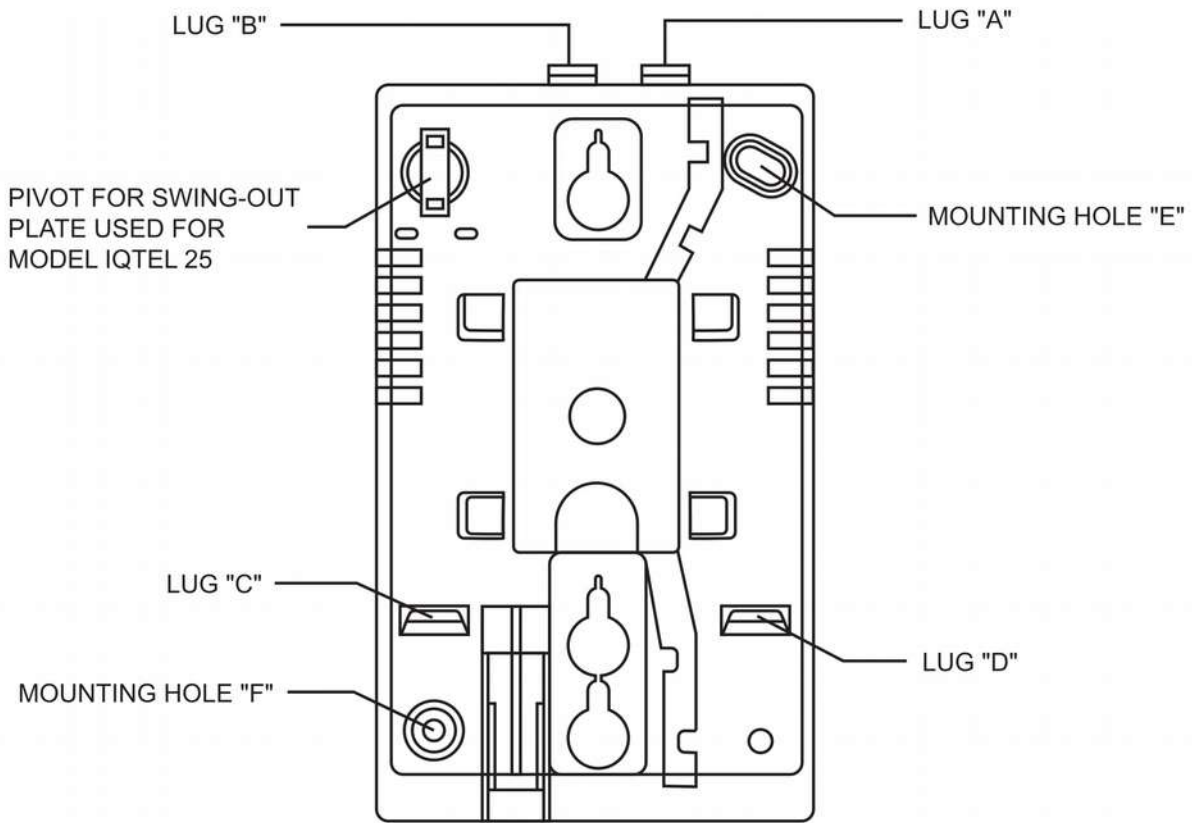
WALL MOUNTING AND WALL MOUNT BRACKET
